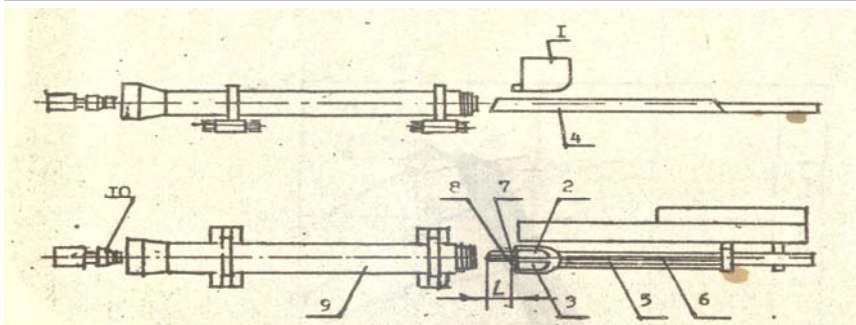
The scheme unit centrifugal machine with pouring device for casting a bilayer castings: 1 - hopper; 2 and 3 – chambers of loading hopper; 4 - ditch; 5 and 6 – channels of ditch; 7 and 8 - tapping holes of the hopper; 9 – casting form; 10 – a head with cores
